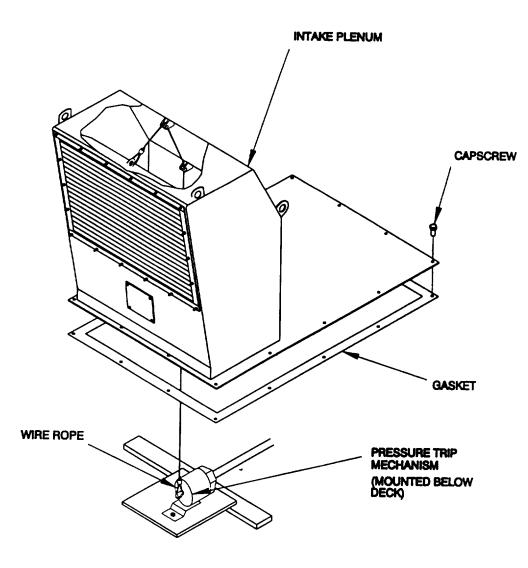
Propulsion Module/Powered Section Assembly (Operator's Cab - View C). (Sheet 4 of 11)
